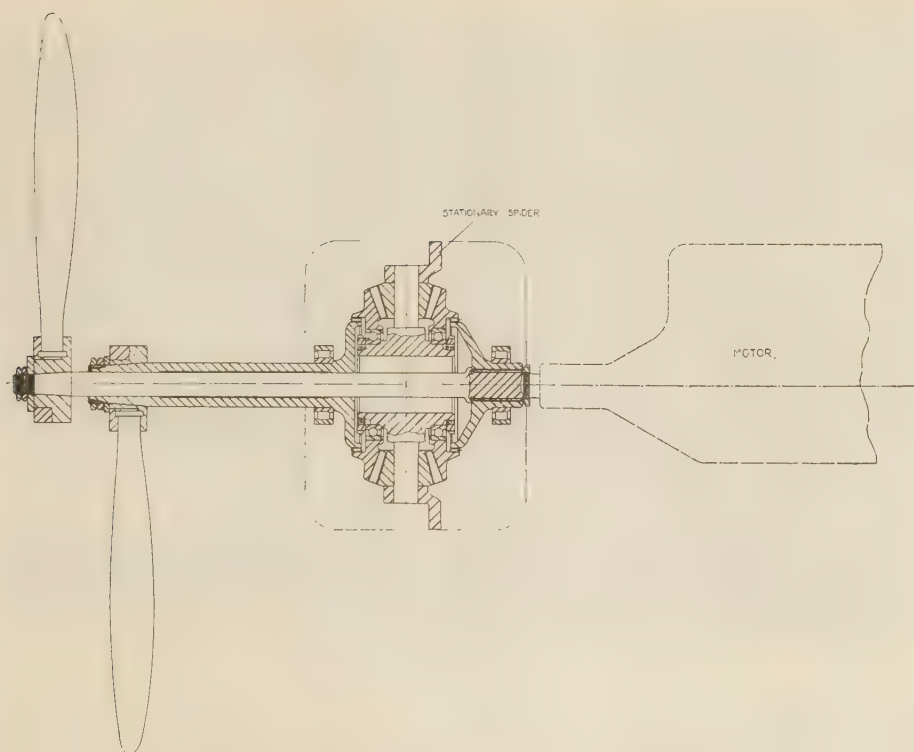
BEVEL-GEAR DRIVE FOR COAXIAL PROPELLERS
